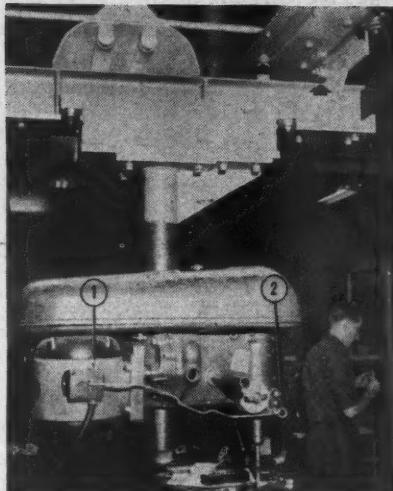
Closeup of bridge and trolley showing anti-sway bearings (bridge) mounted on eccentric shoulder bolts for accurate adjustment (heavy arrows); bench light control switch (1) and remote control lever for motor (2). Drill press head can be quickly removed from trolley post and replaced on original pedestal.
